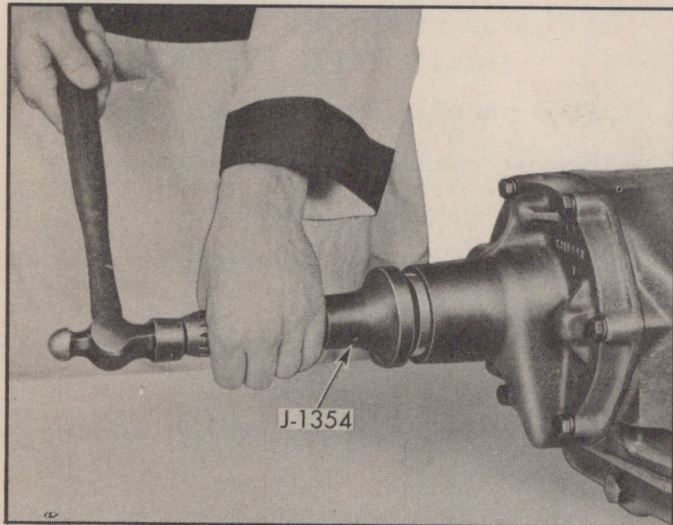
Installing Rear Bearing Retainer Seal Using Tool J-1354
